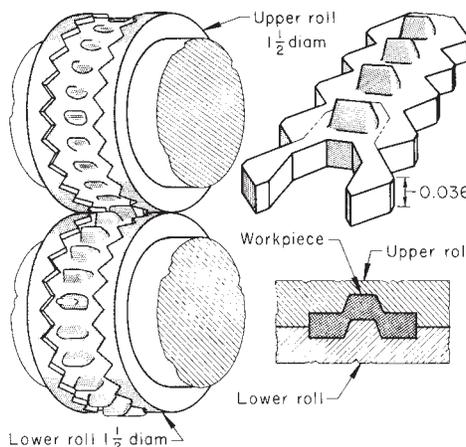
Copper alloy C22600 interlocking-fastener element produced on coining rolls. Dimensions given in inches
